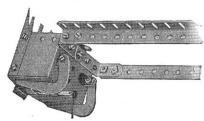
A. If available, the Meccano Digger Bucket (part No. 169) may be used with advantage in place of the built-up Bucket, as shown.
